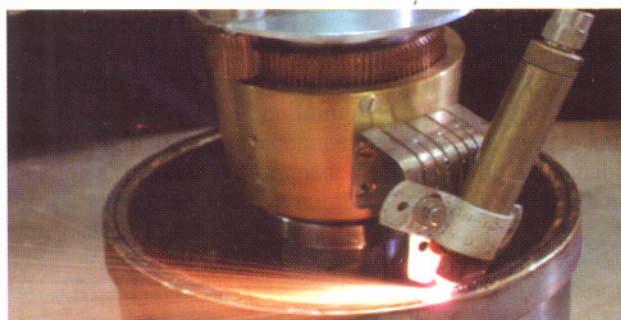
A view of laser cutting mock up of bellow ring joint with outer tube.
